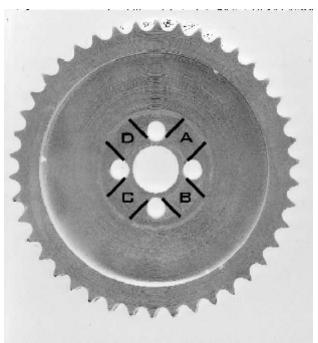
Arrangement of holes of stock TR6 cam sprocket. Dimensions A and D are 0.390 inches; dimensions B and C are 0.370 inches (average of three sprockets).
